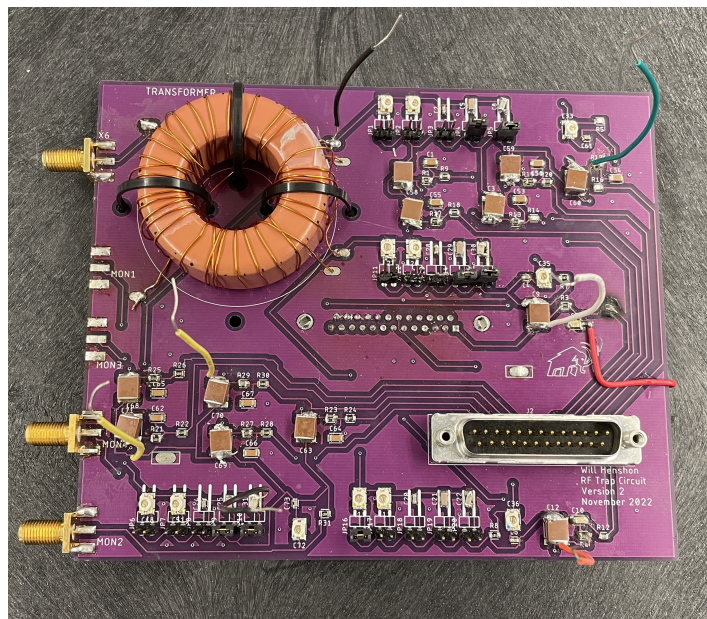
Fully built printed circuit board with components for the trap circuit. Dimensions of the board are 15.24 cm x 12.7 cm.
